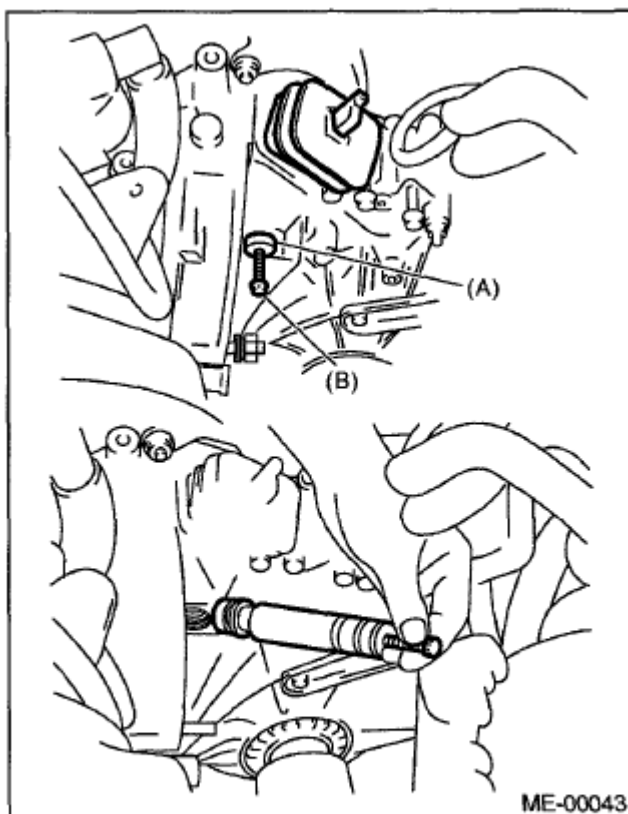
Removing Service Hole Plug Using Hexagon Wrench
